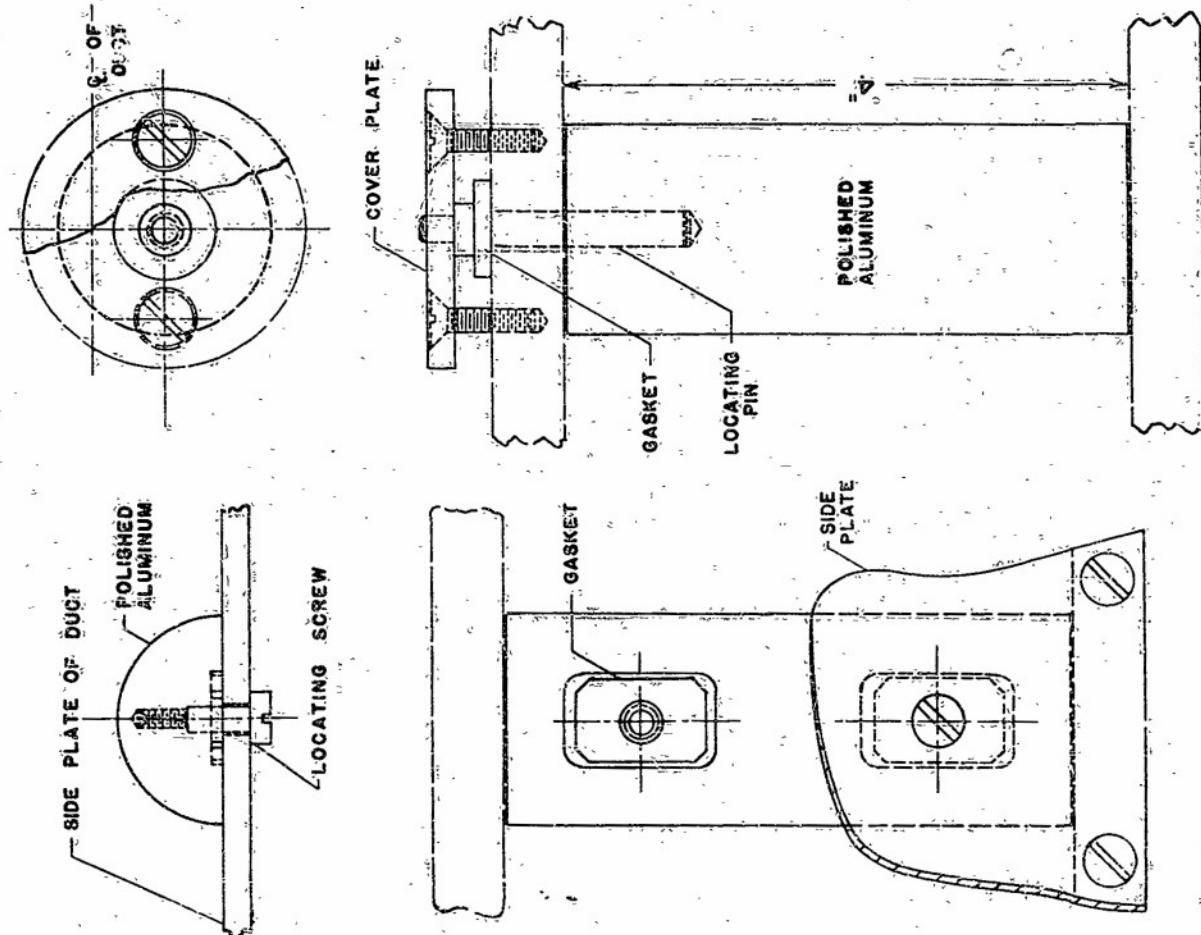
SKETCH SHOWING METHOD OF HOLDING DUMMY HALF-CYLINDERS FOR STAGGERED CONFIGURATION AND WHOLE CYLINDERS FOR DOUBLE-ROW STAGGERED CONFIGURATION
